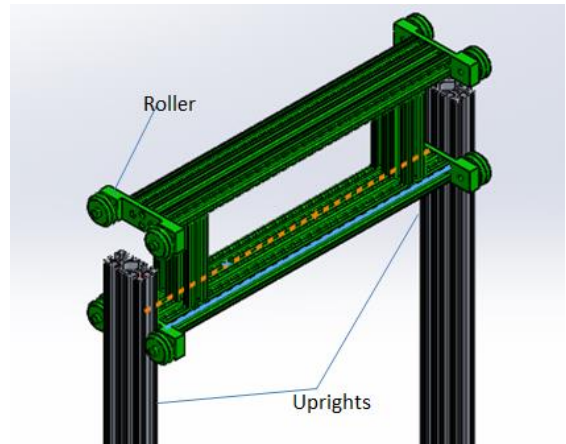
, Concept 1 Roller Sub-Assembly and Uprights
